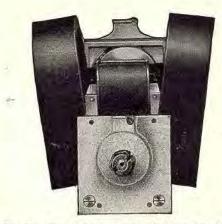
Rear view of magneto. Note that by taking out four screws, the winding coil (23) and condenser (1) (Fig. 26) can be removed. The magnets (2) (Fig. 26) are exposed and removed when taking off the cover.
